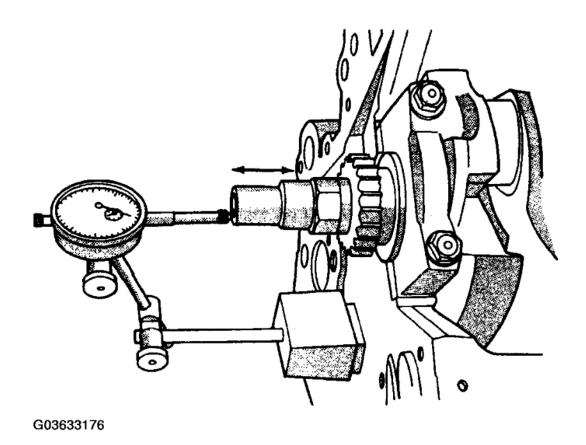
Checking Crankshaft End Play-Typical Courtesy of DAIMLERCHRYSLER CORP.
